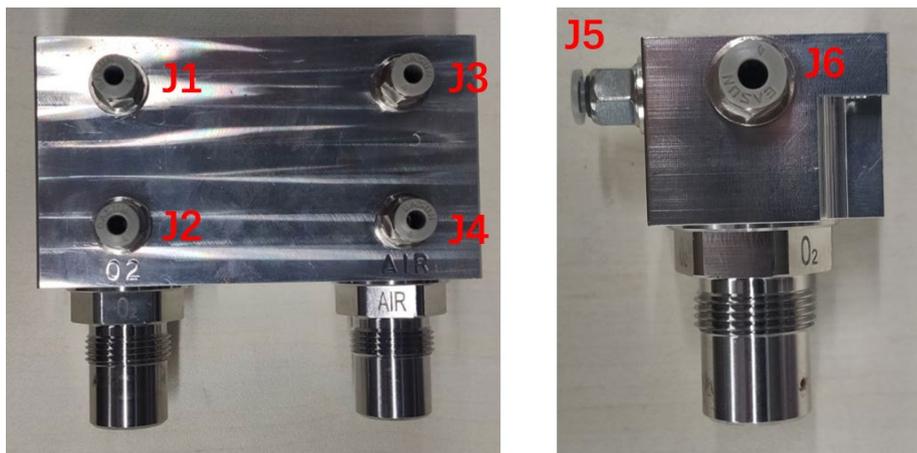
Structural diagram of oxygen supply inlet assembly and oxygen/air supply inlet assembly
